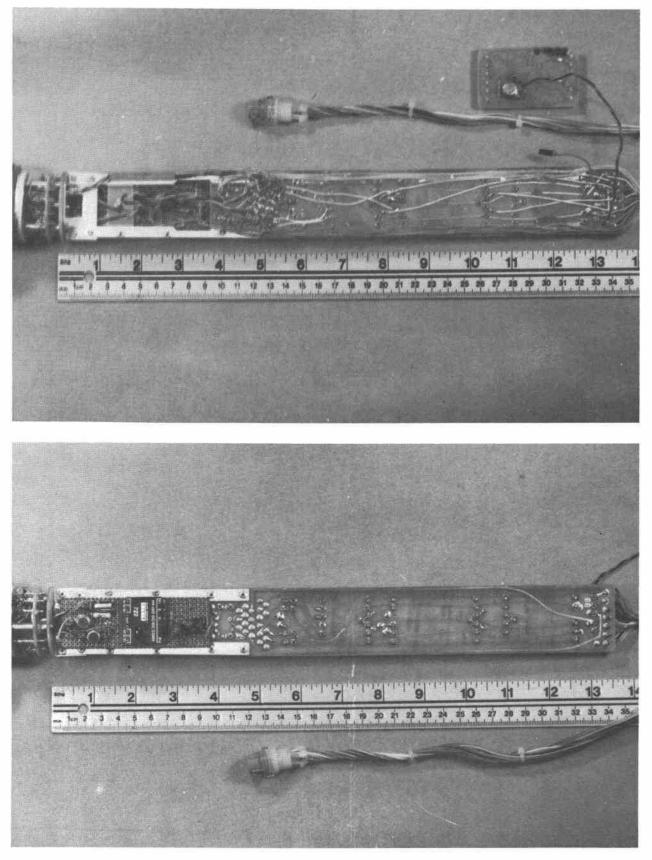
Photographs of DC/DC converter mounted on motherboard.
